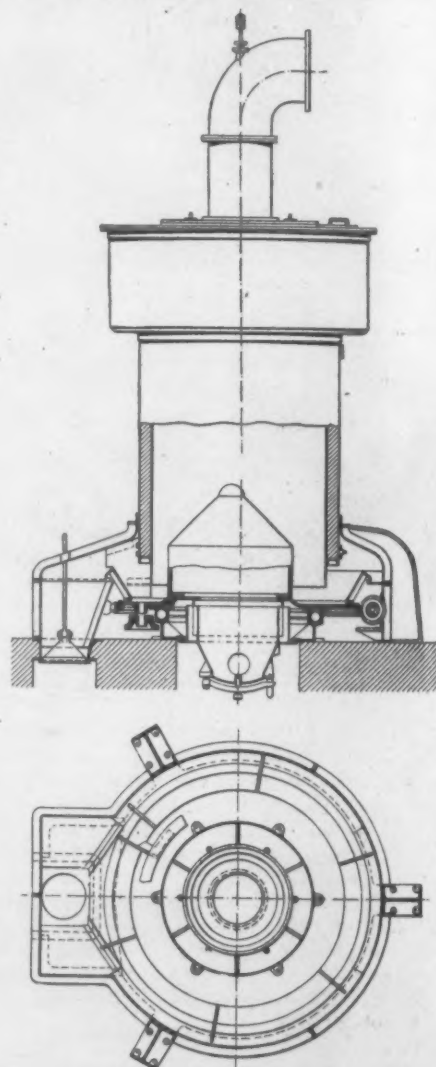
Section and Plan of the Kerpely High Pressure Gas Producer
